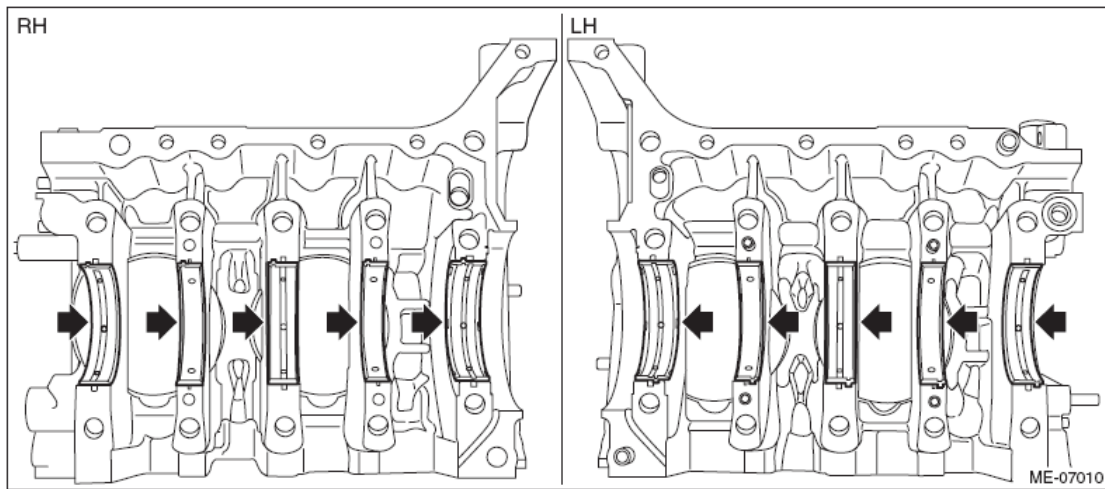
Installing Crankshaft Bearing To Cylinder Block
